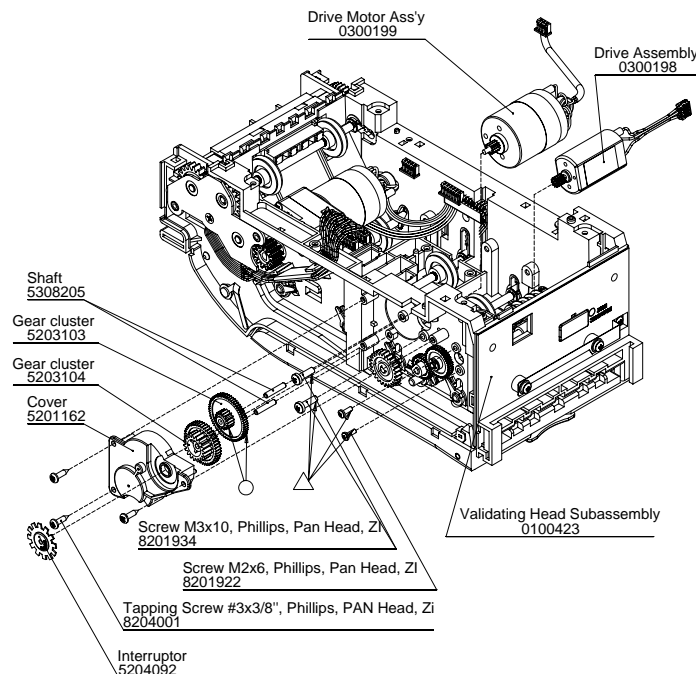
Drive Assembly (0300199 and 0300196) Removal
